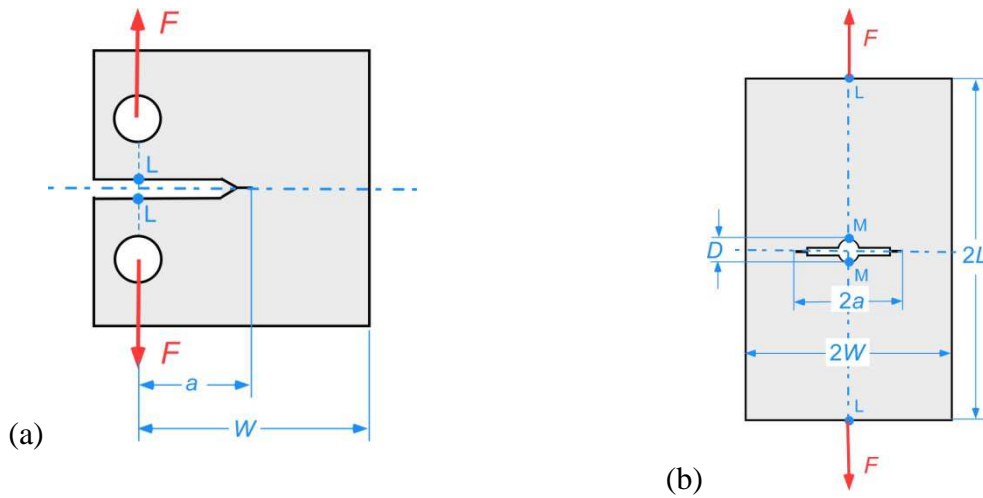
Fracture mechanics specimens; (a) compact specimen C(T), (b) centre-cracked panel M(T).
